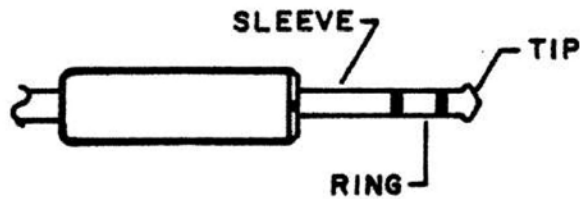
Tip-Ring-Sleeve Plug Outline Drawing.
